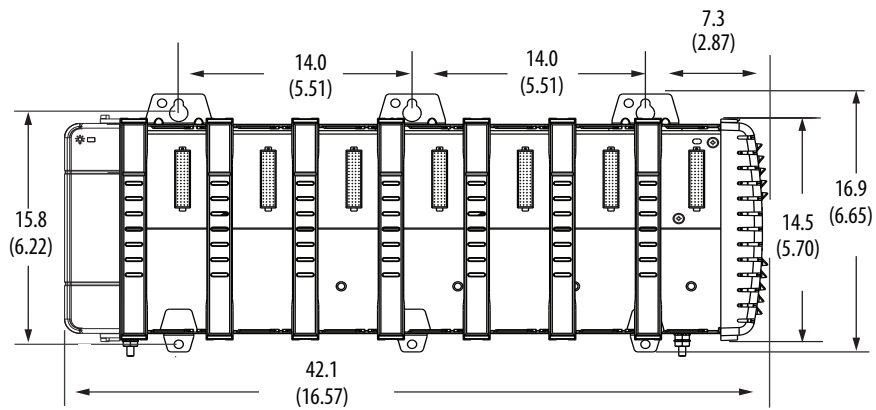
1756-A7XT/C Chassis and Chassis Adapter
